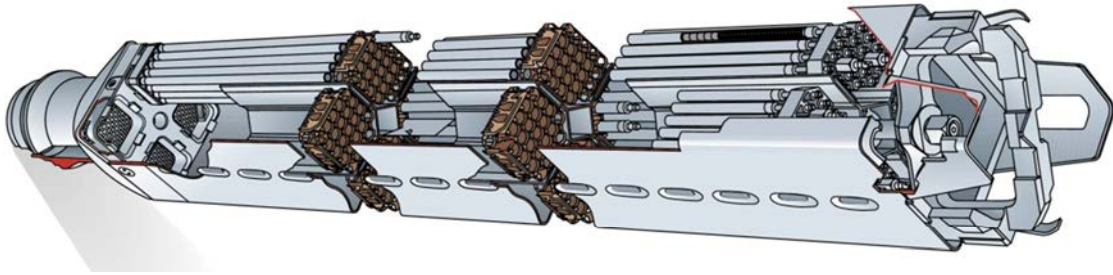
Schematic of a BWR fuel assembly (figure courtesy of SKB).
